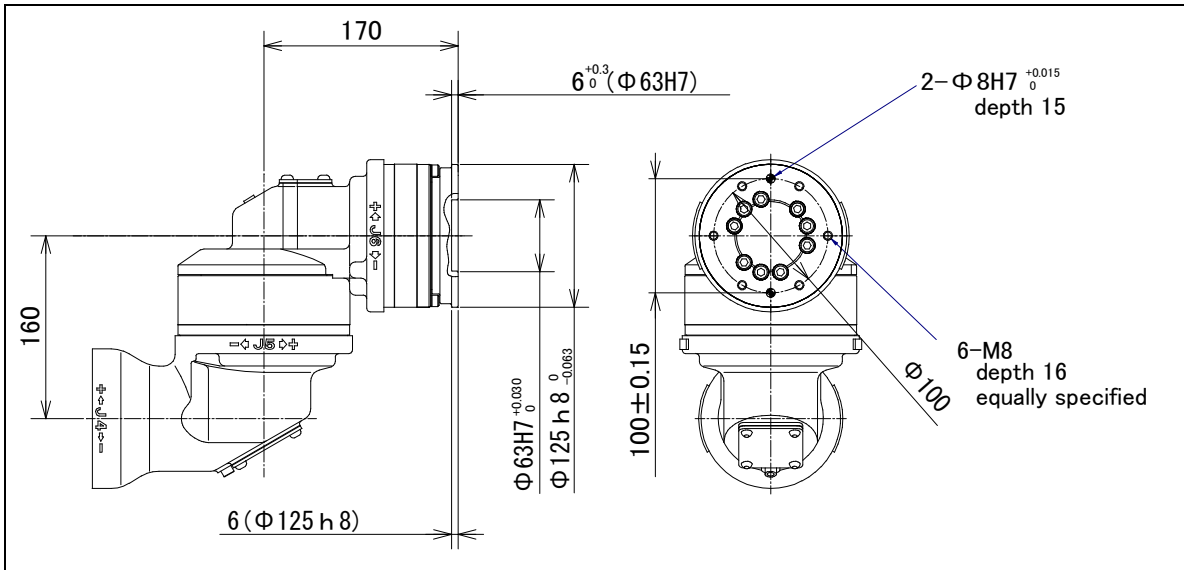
(d) ISO flange (M-710iC/50E)
